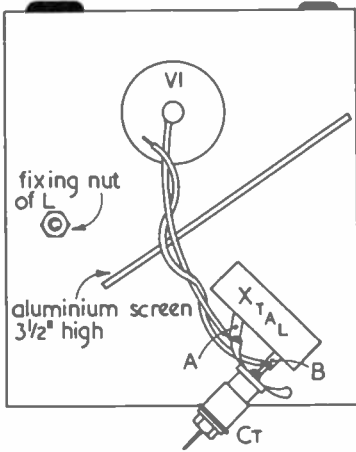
Plan view of unit. A is grid lead and fixed plates of CT are soldered to tag of crystal holder here. B is wire of C¹ (see text), and moving plates of CT are soldered to tag of crystal holder here. This tag is earthed at chassis
